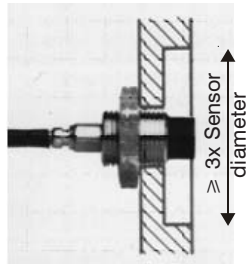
Example of flush assembly of an unshielded sensor in a metal support
